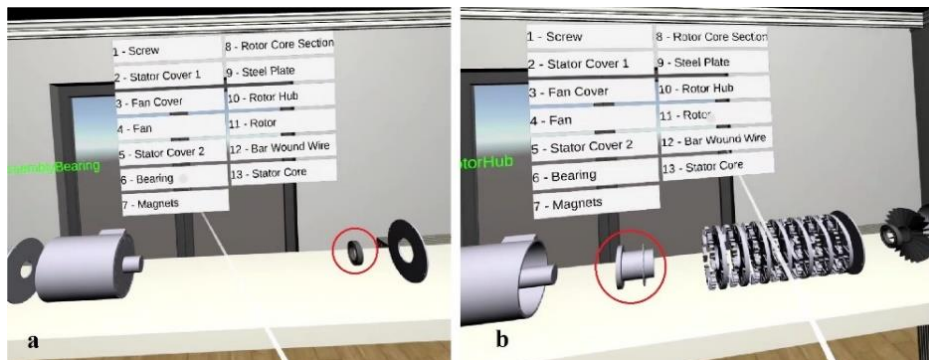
The part separated (Assembly Machine). (a) (6- Bearing). (b) (10- Rotor Hub).
